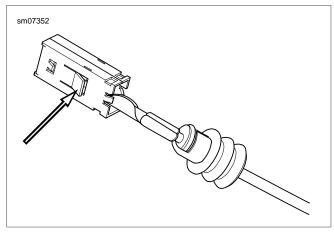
Tangs: Bosch Compact 1.1M Socket Terminal
